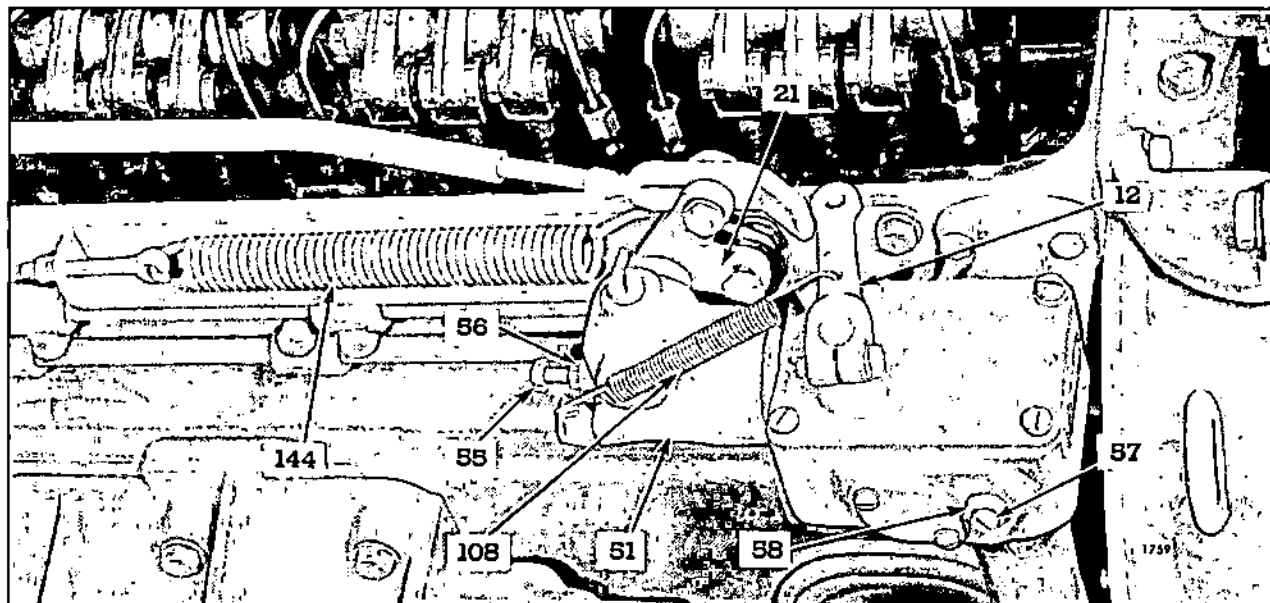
Buffer and Idle Speed Adjusting Screws
